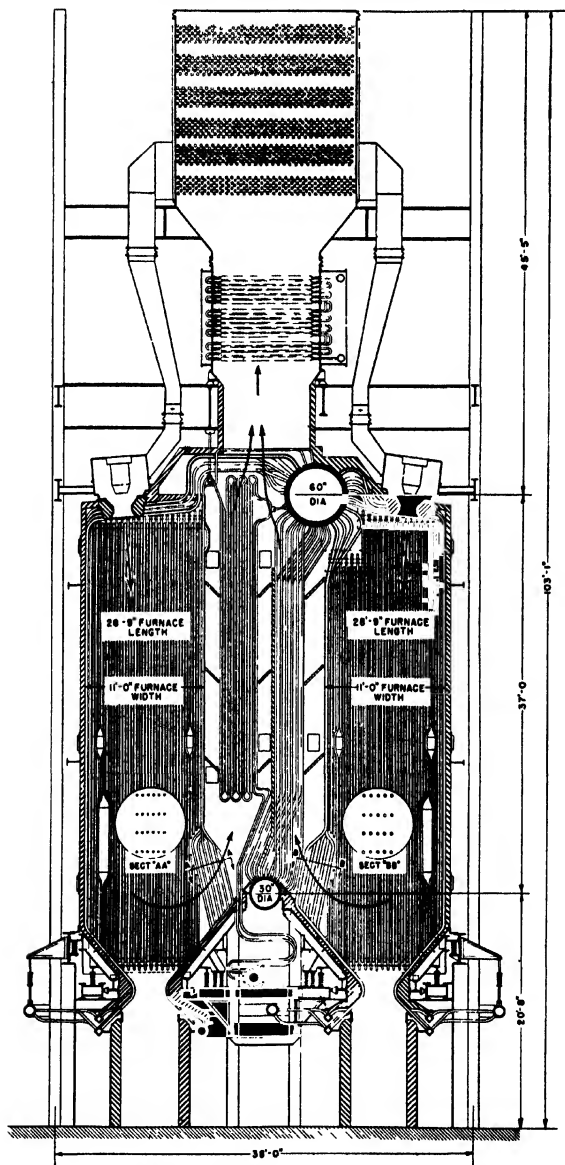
Boiler unit with twin furnace. (Courtesy of the Foster-Wheeler Corporation.)
